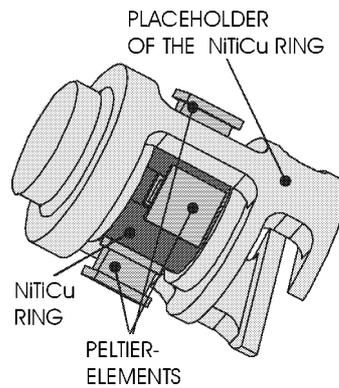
Place holder for SMA ring with Peltier cooling devices. The holder connects the ring with the tube.
